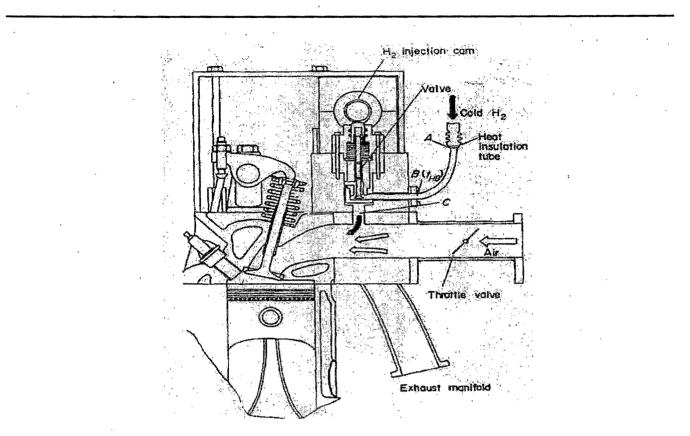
Four Stroke Engine Used Intake Injection Port Technique [12]
